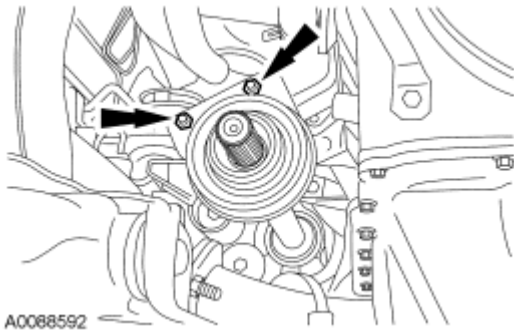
Locating Intermediate Shaft Retaining Nuts
